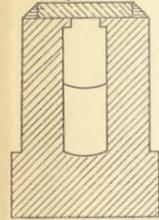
Schnitt c-d: Section view c-d of the cascade passage, showing a vertical dimension of 65.
